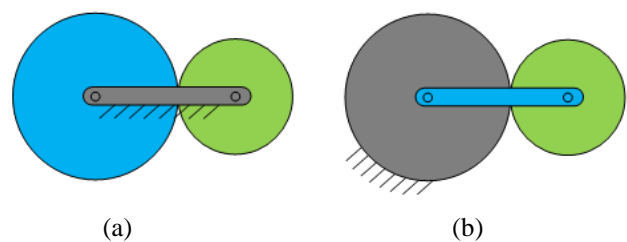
(a) Gear train with fixed axis of rotation (b) Gear train with one gear axis revolving around the other fixed gear axis
